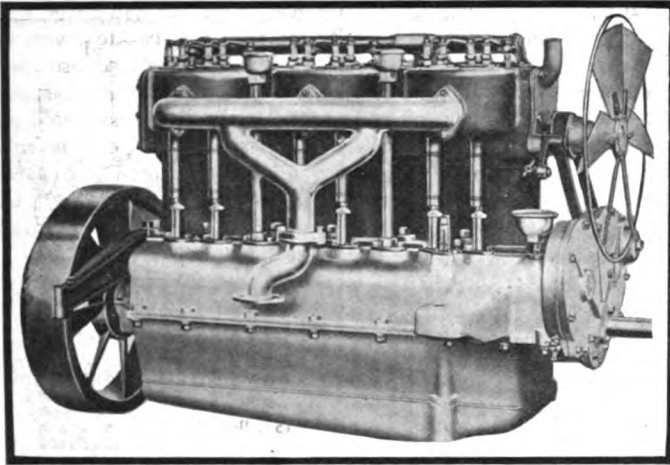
Bringing out clean design of intake side of the Kline 6-60 motor
